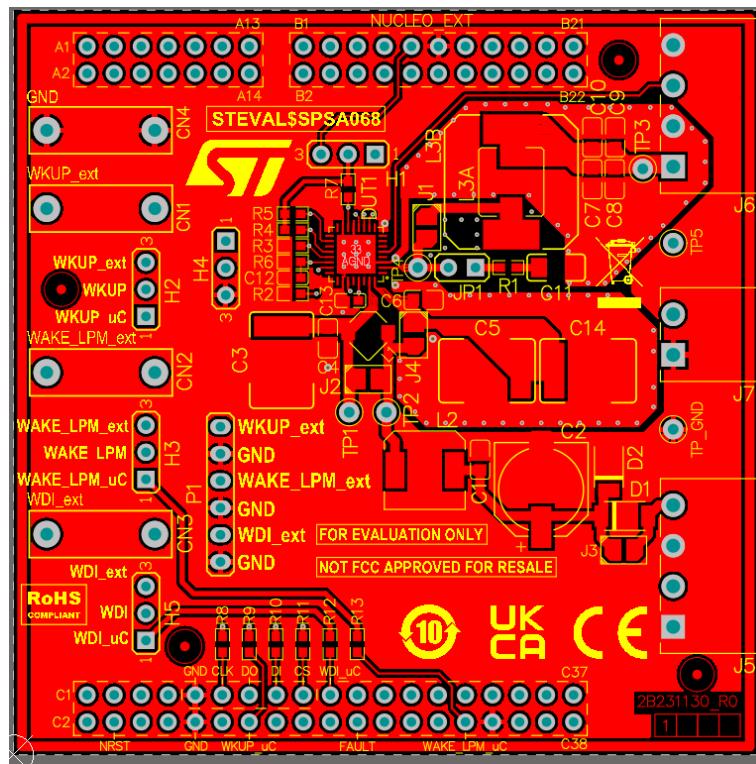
STEVAL-SPSA068 application board assembly BOTTOM
